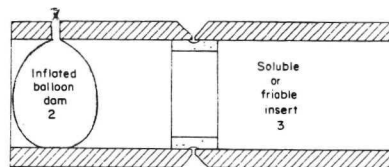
A standard method of applying argon to the back of a weld.
